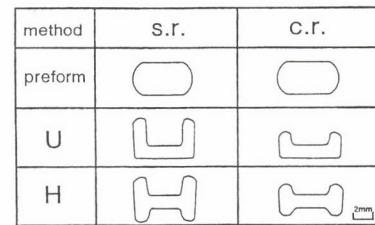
Cross-sections of preformed, U-shaped and H-shaped wires.
